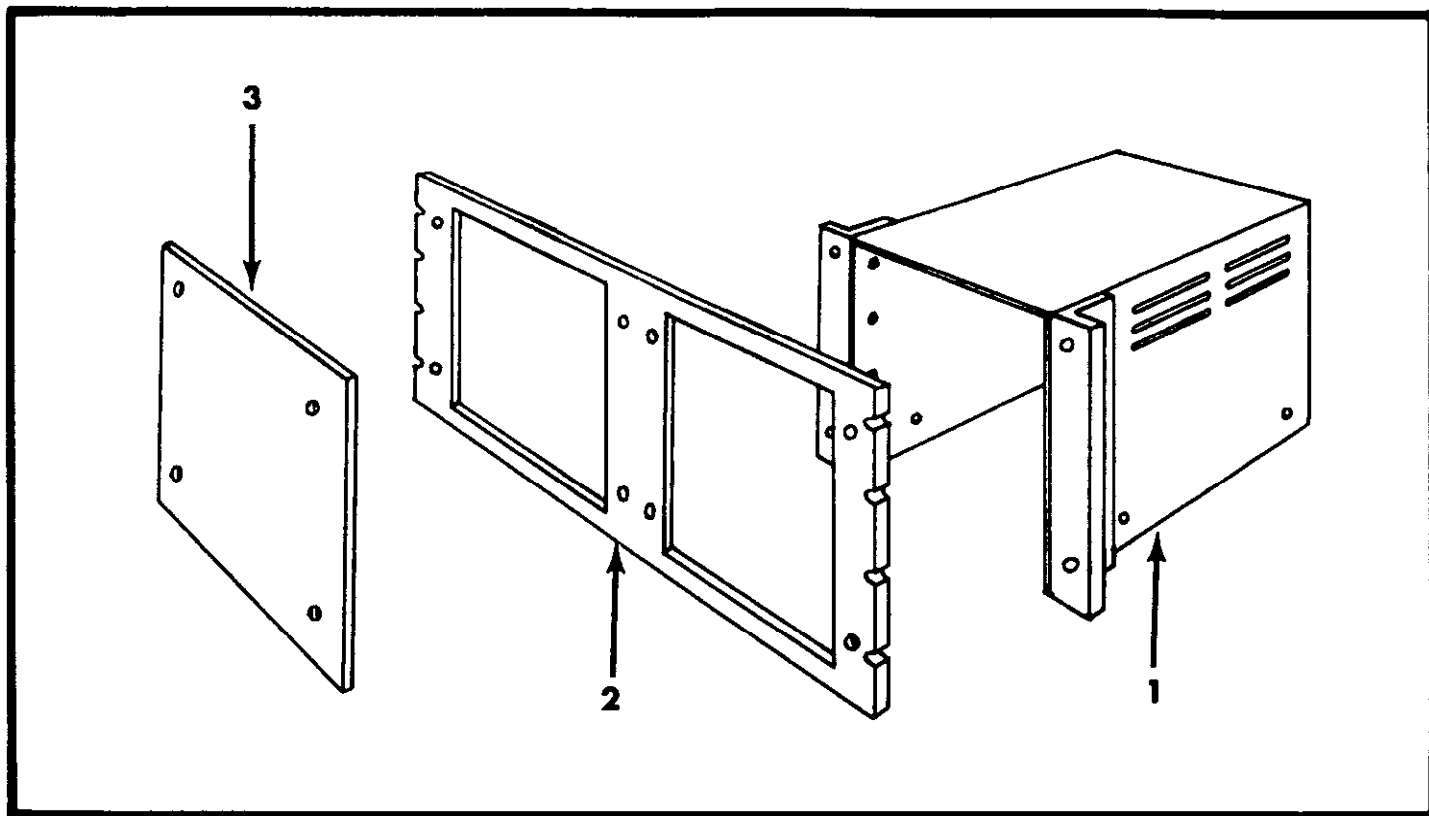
Exploded View of Model 4005 Rack Mounting Kit. Refer to Table 7 for parts list.
